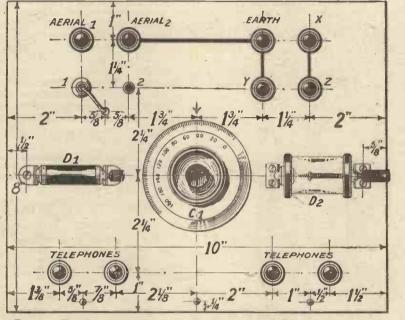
The layout is attractive in appearance. Dimensions may be taken from this diagram. Blueprint No. C. 1072 A.
